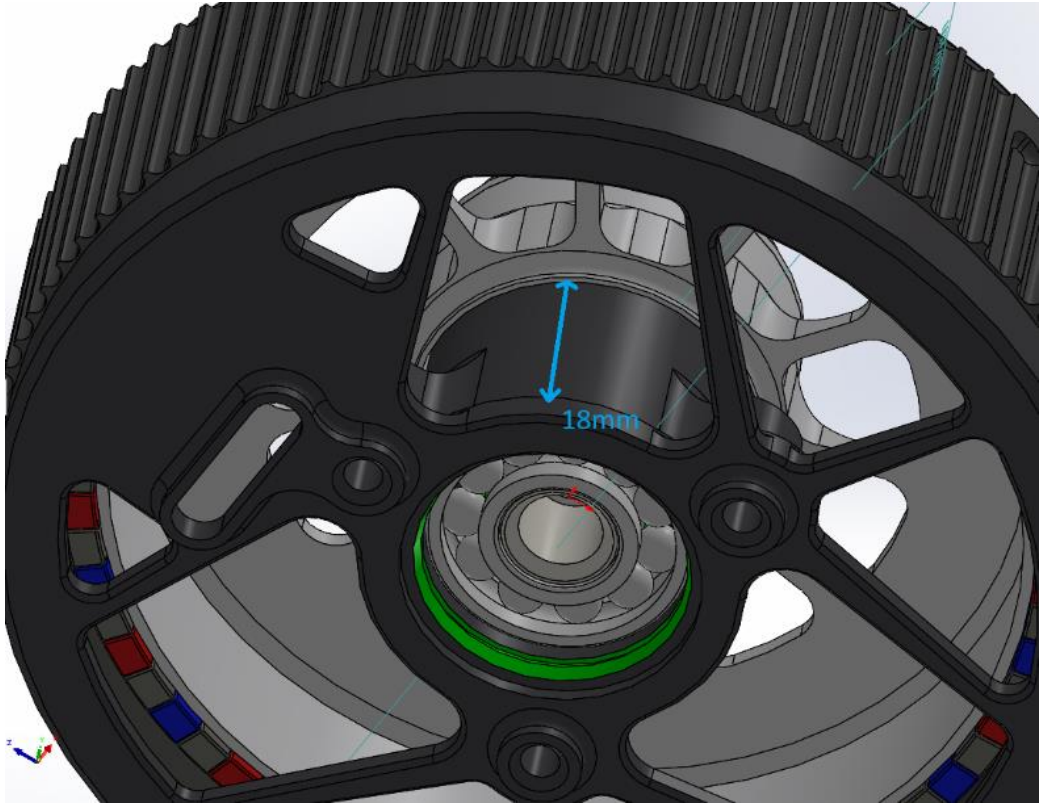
3D MODEL OF MOTOR ILLUSTRATING SPACE FOR SENSOR PLACEMENT ON THE MOTOR
